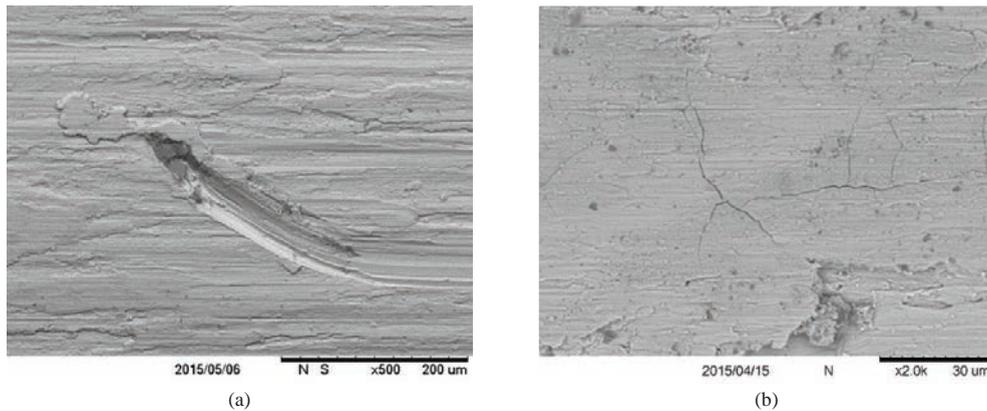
(a) Embedded abrasive and (b) microcracks found on the machined surface of Ti-6Al-4V alloy after grinding with SiC wheel and MQL technique at  $a_e = 20 \mu\text{m}$ .
